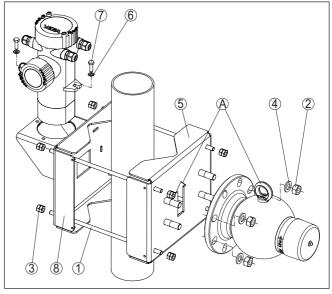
Mounting bracket with vertically mounted sensor (with VEGASOURCE 31, 35)
